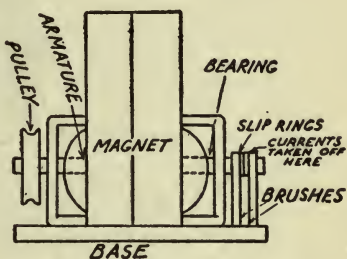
A, B, C.— PARTS OF THE LOW TENSION MAGNETO
